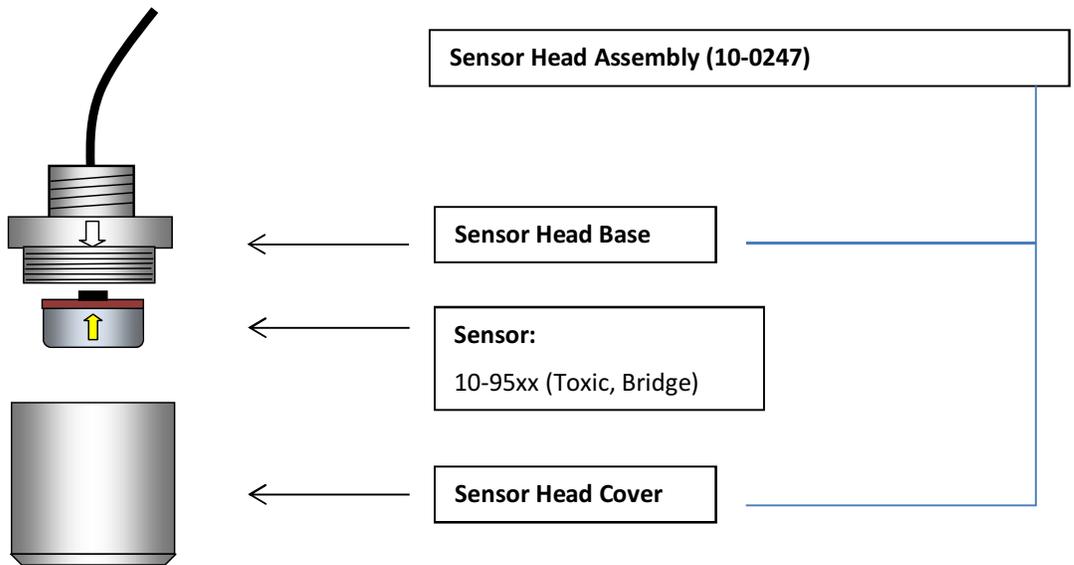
GDS-58XP Standard Sensor Head Exploded View
